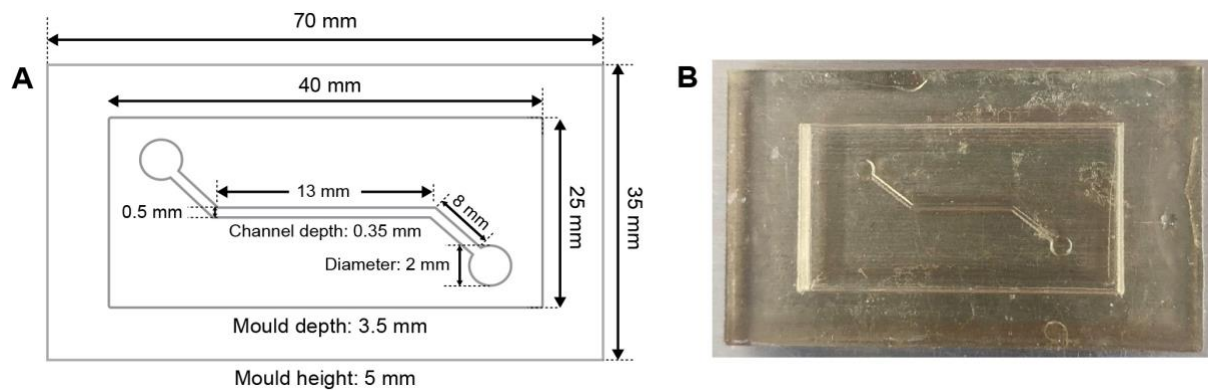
Mould design and dimensions. A) Schematic design of device mould with specified dimensions of the channel, hollowed region of the mould and mould exterior (not drawn to
